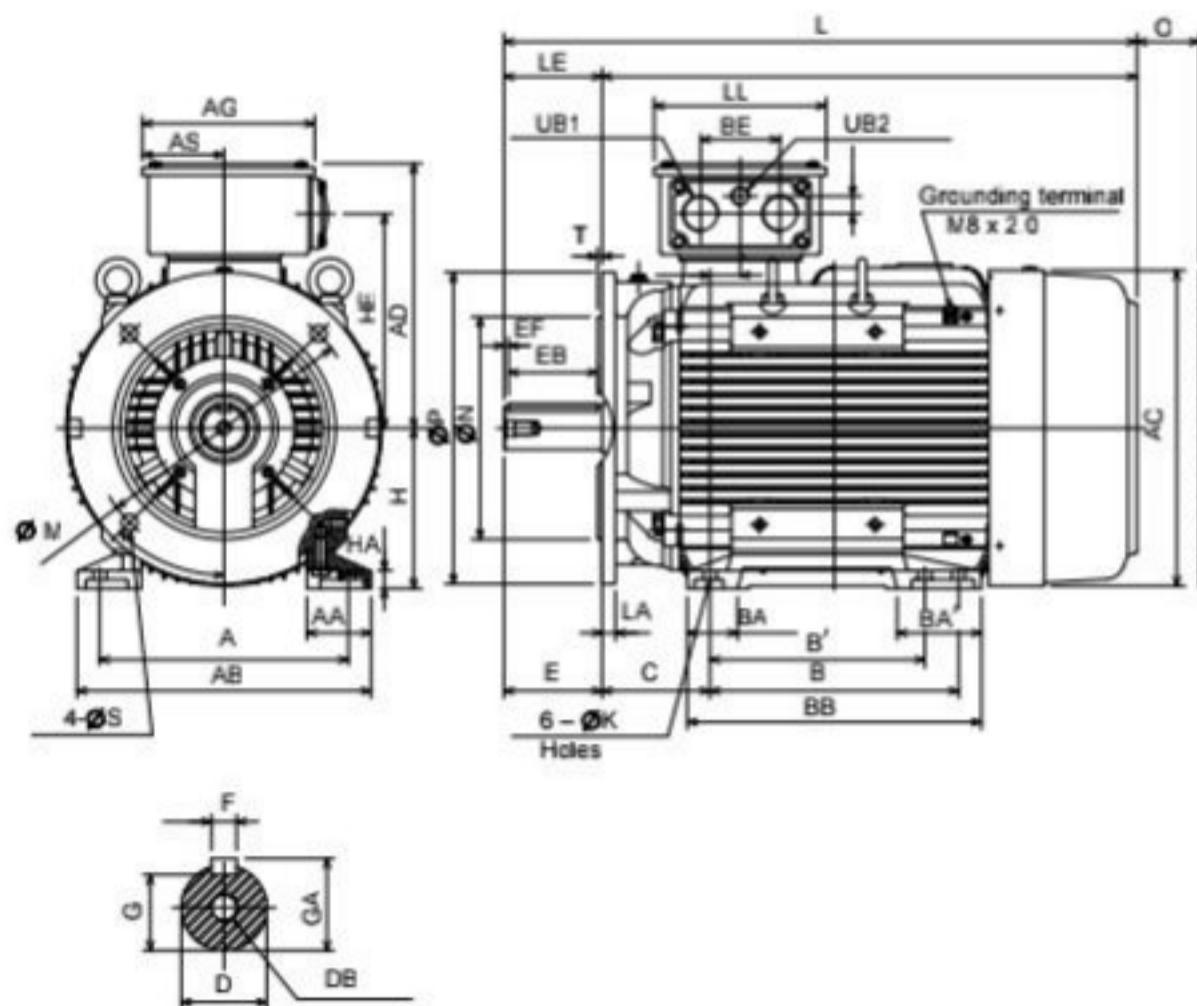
Outline drawing of cast iron design, mounting B35; frame size 160 – 180
